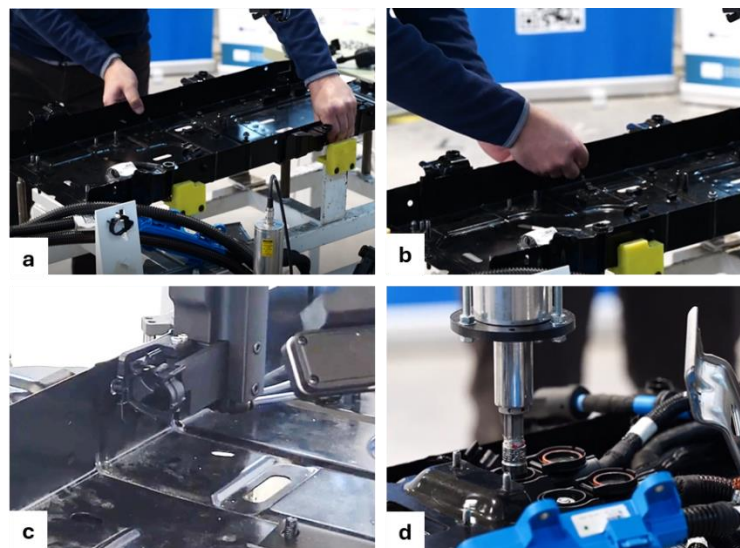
[a] Operator places battery in place. [b] Operator inserts clamps, [c] Robot inserts clamps, [d] Robot screwing task.
